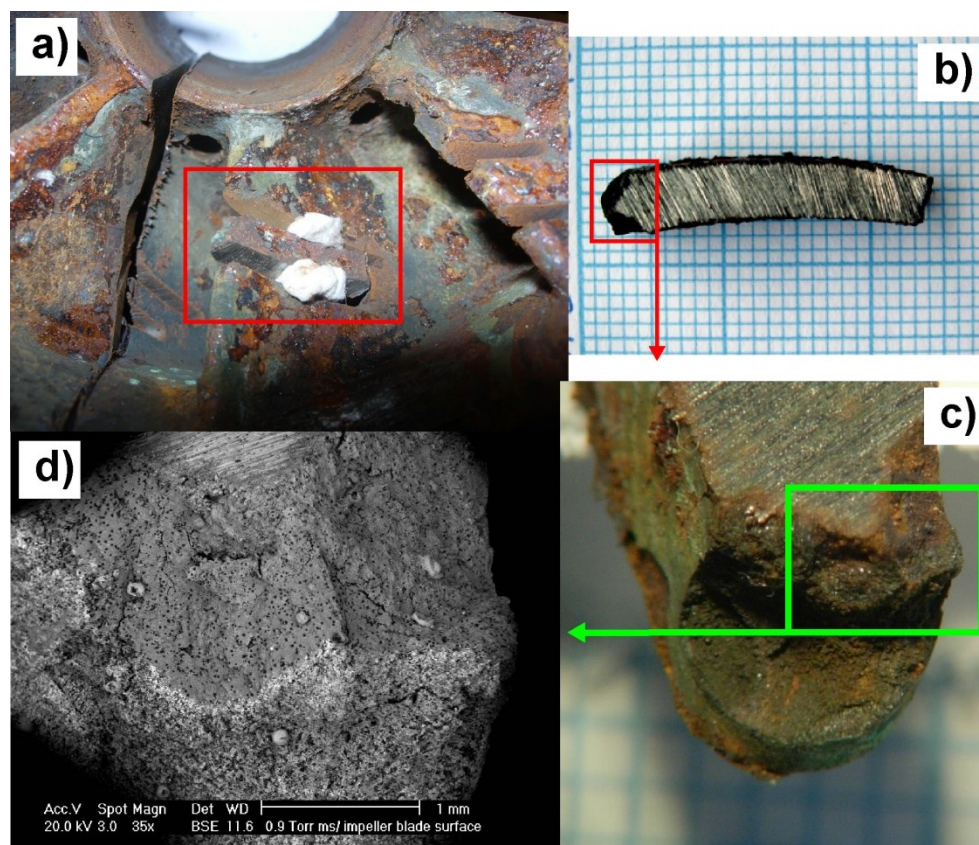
a) Cutted section of an impeller blade from impeller N°16. Size: 22x5x5 mm. b) Close-up view of the cross section. c) Close-up view of the crater shaped pits. d) Exposure of the impeller blade surface by electron microscopy.
